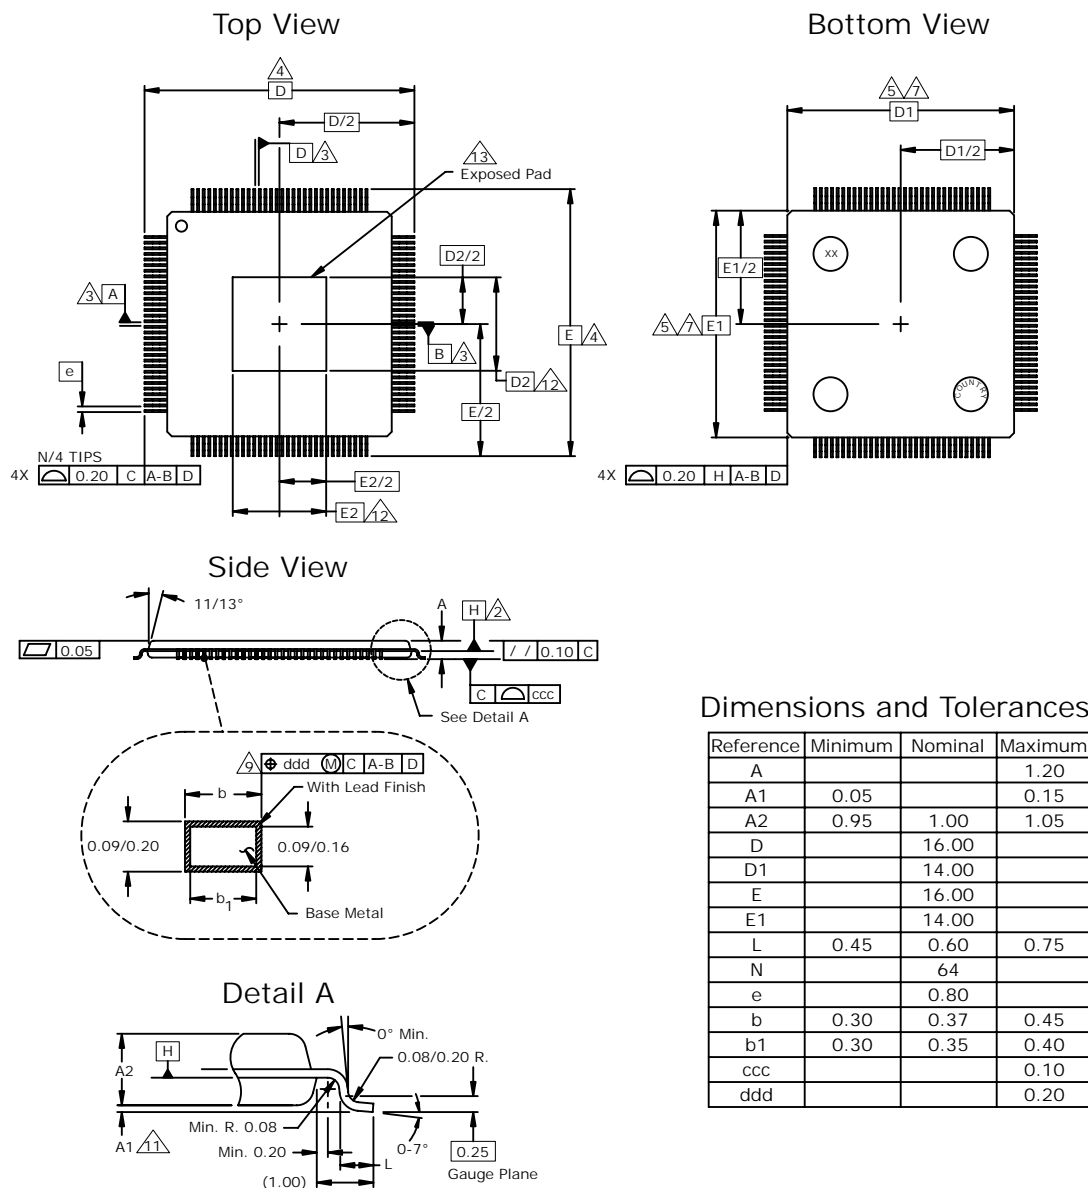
Package Drawing for the VSC7123RD and VSC7123XRD
